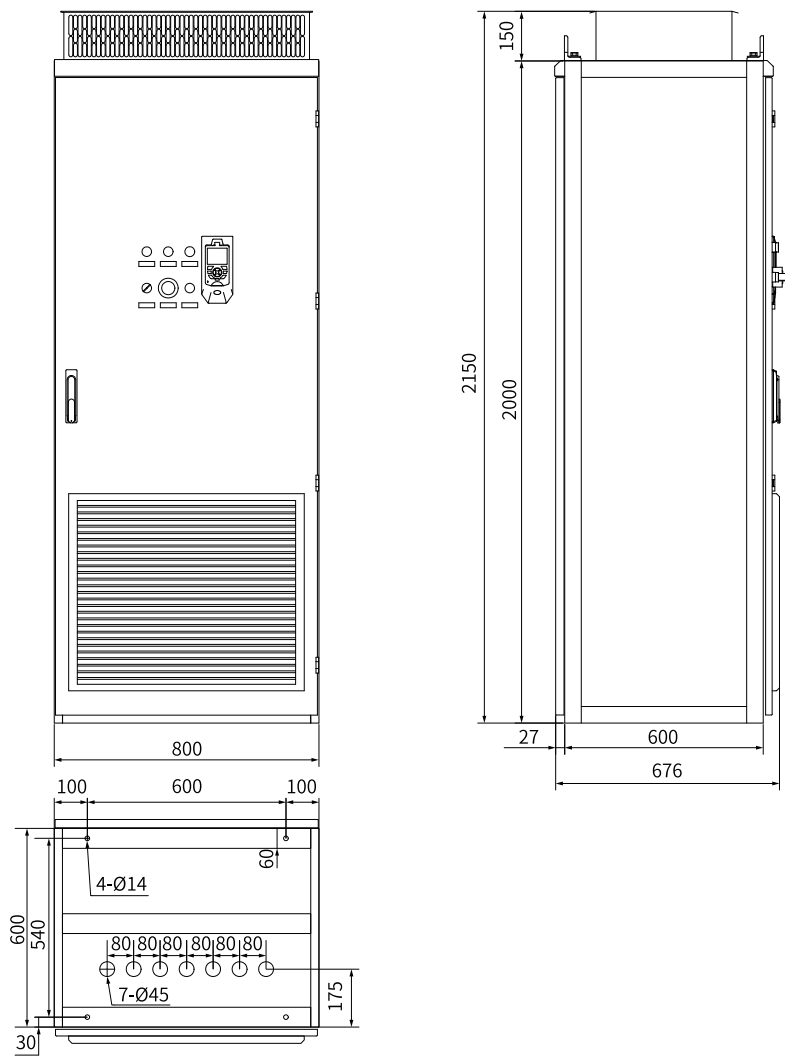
800-mm wide auxiliary cabinet (mm)
